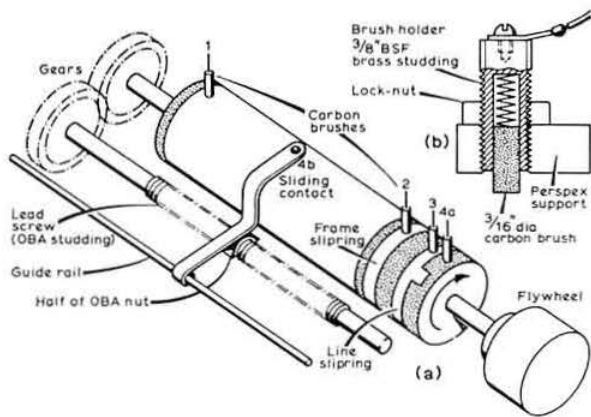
(a) A diagrammatic view of the mechanical assembly showing the drive mechanism and electrical take-off points (b) Details of brush holder
